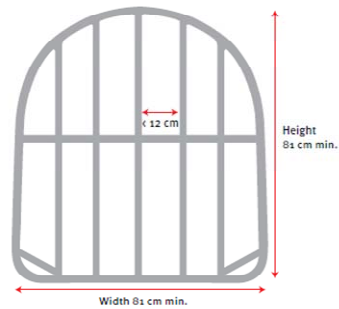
Minimum external TED grid dimensions and maximum bar spacing dimension
